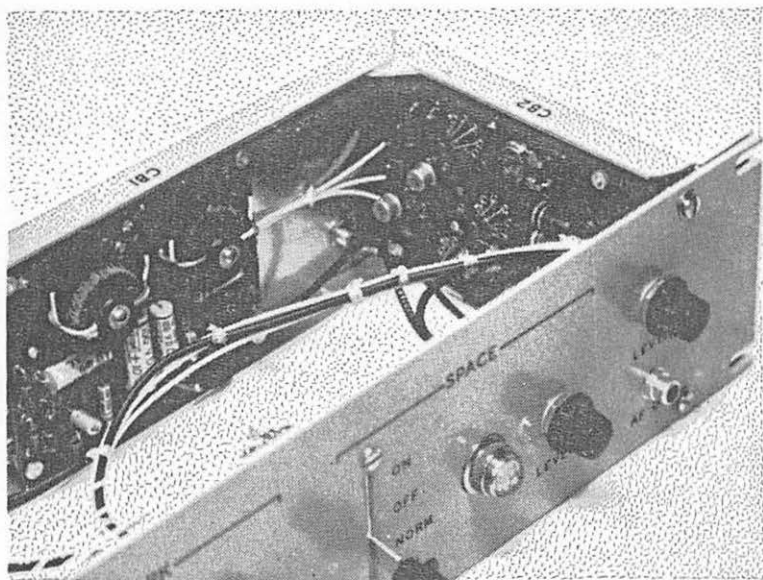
Oscillator and amplifier lamp-driver boards shown installed. The power distribution board is mounted on the other end of the chassis.
